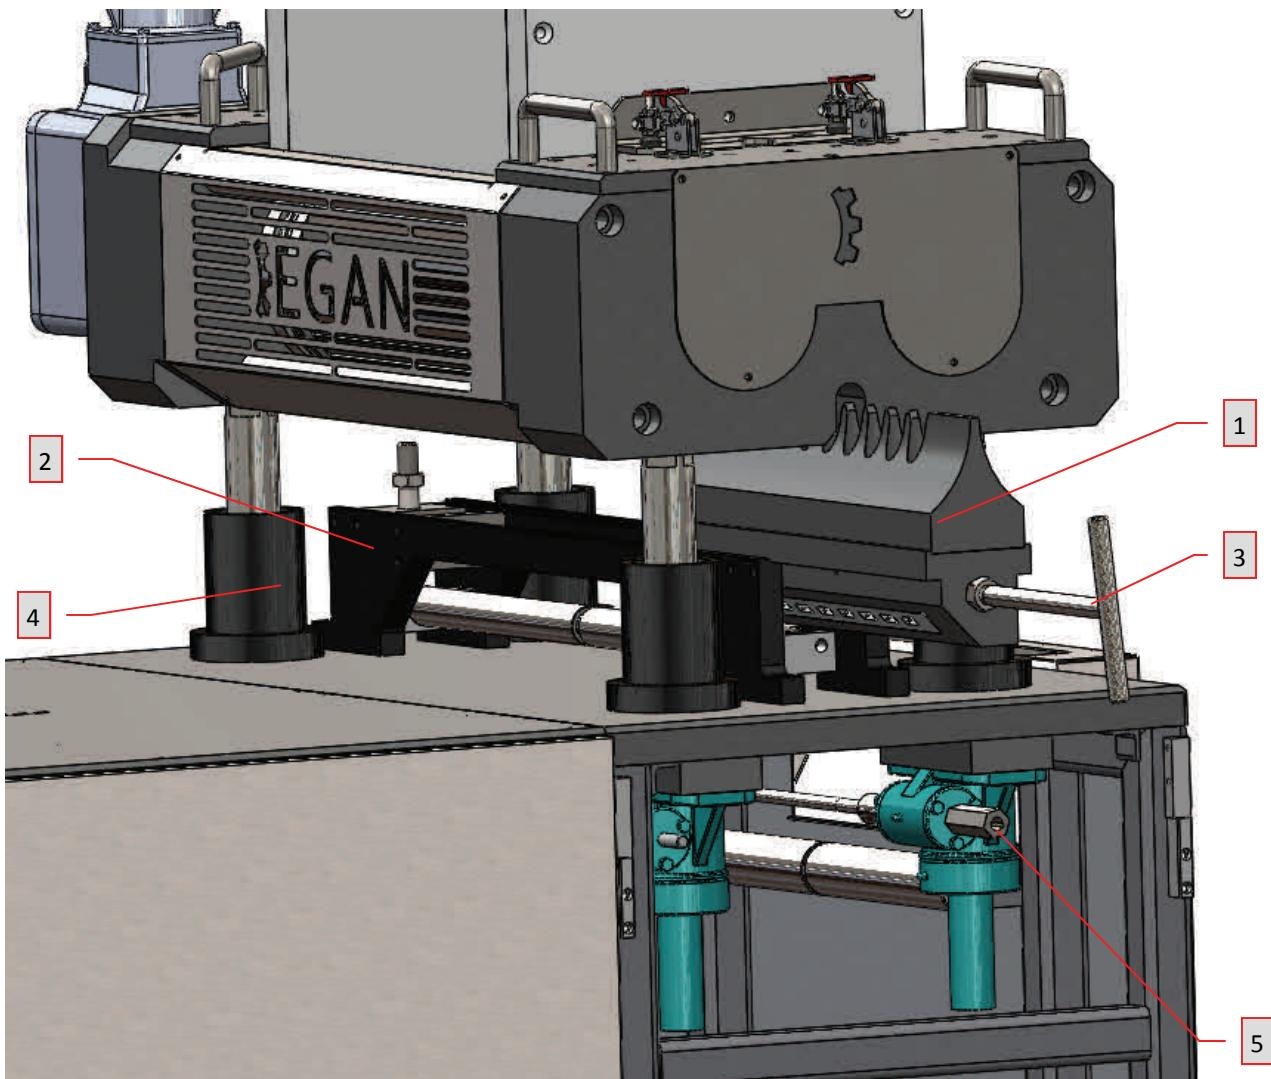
Detail of Jack Screw, Filler Block, and Die
